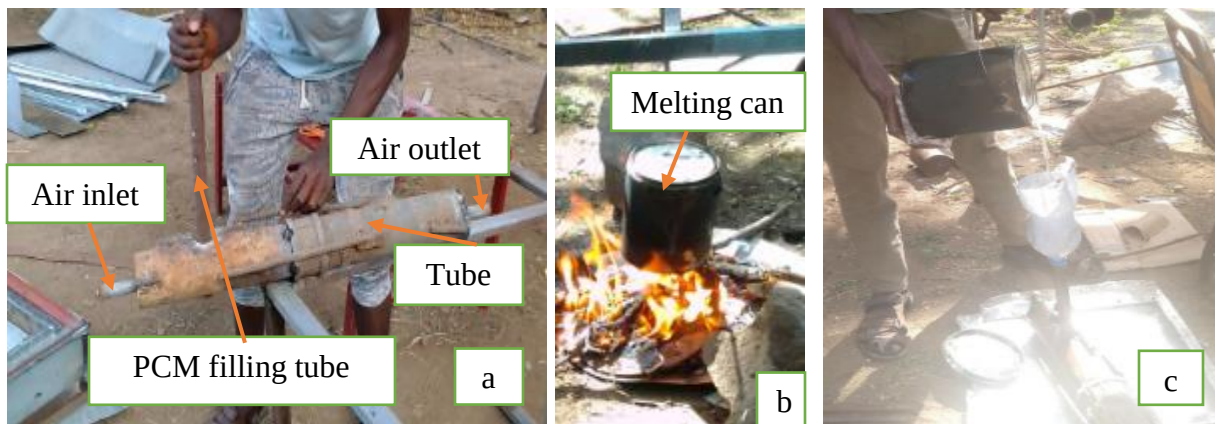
5 Thermal energy storage ; a) construction of tube, b) melting of paraffin c) filling of tube
